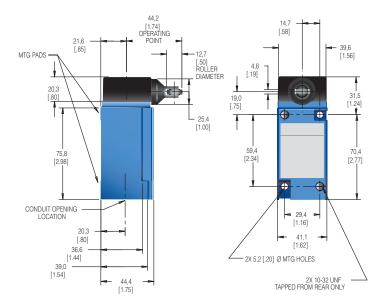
MICRO SWITCH HDLS LSF Series side roller plunger (double pole) dimensions
